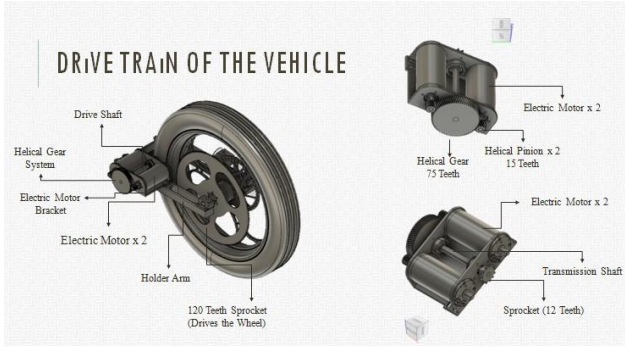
Electric motor, gearbox, transmission shaft, and electric motor holder [19]
